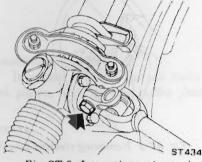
Loosening nut securing lower joint to pinion gear
